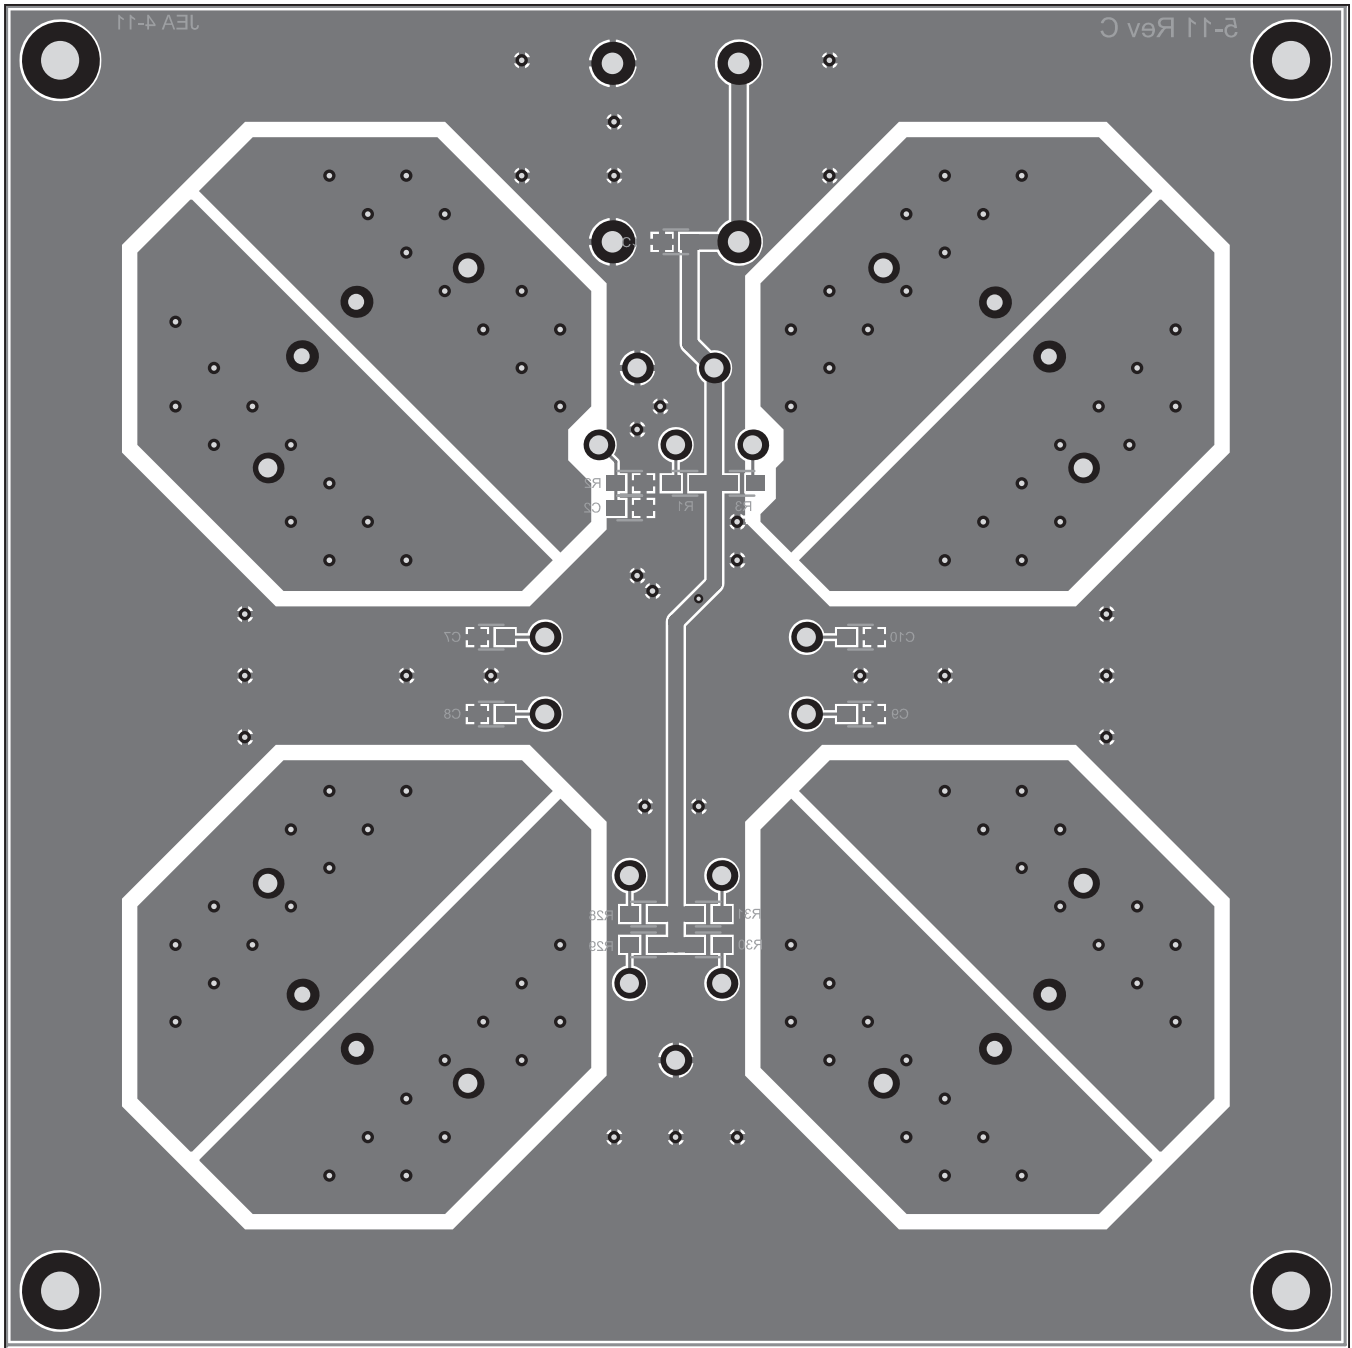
MAX34406 EV Kit PCB Bottom Drawing
